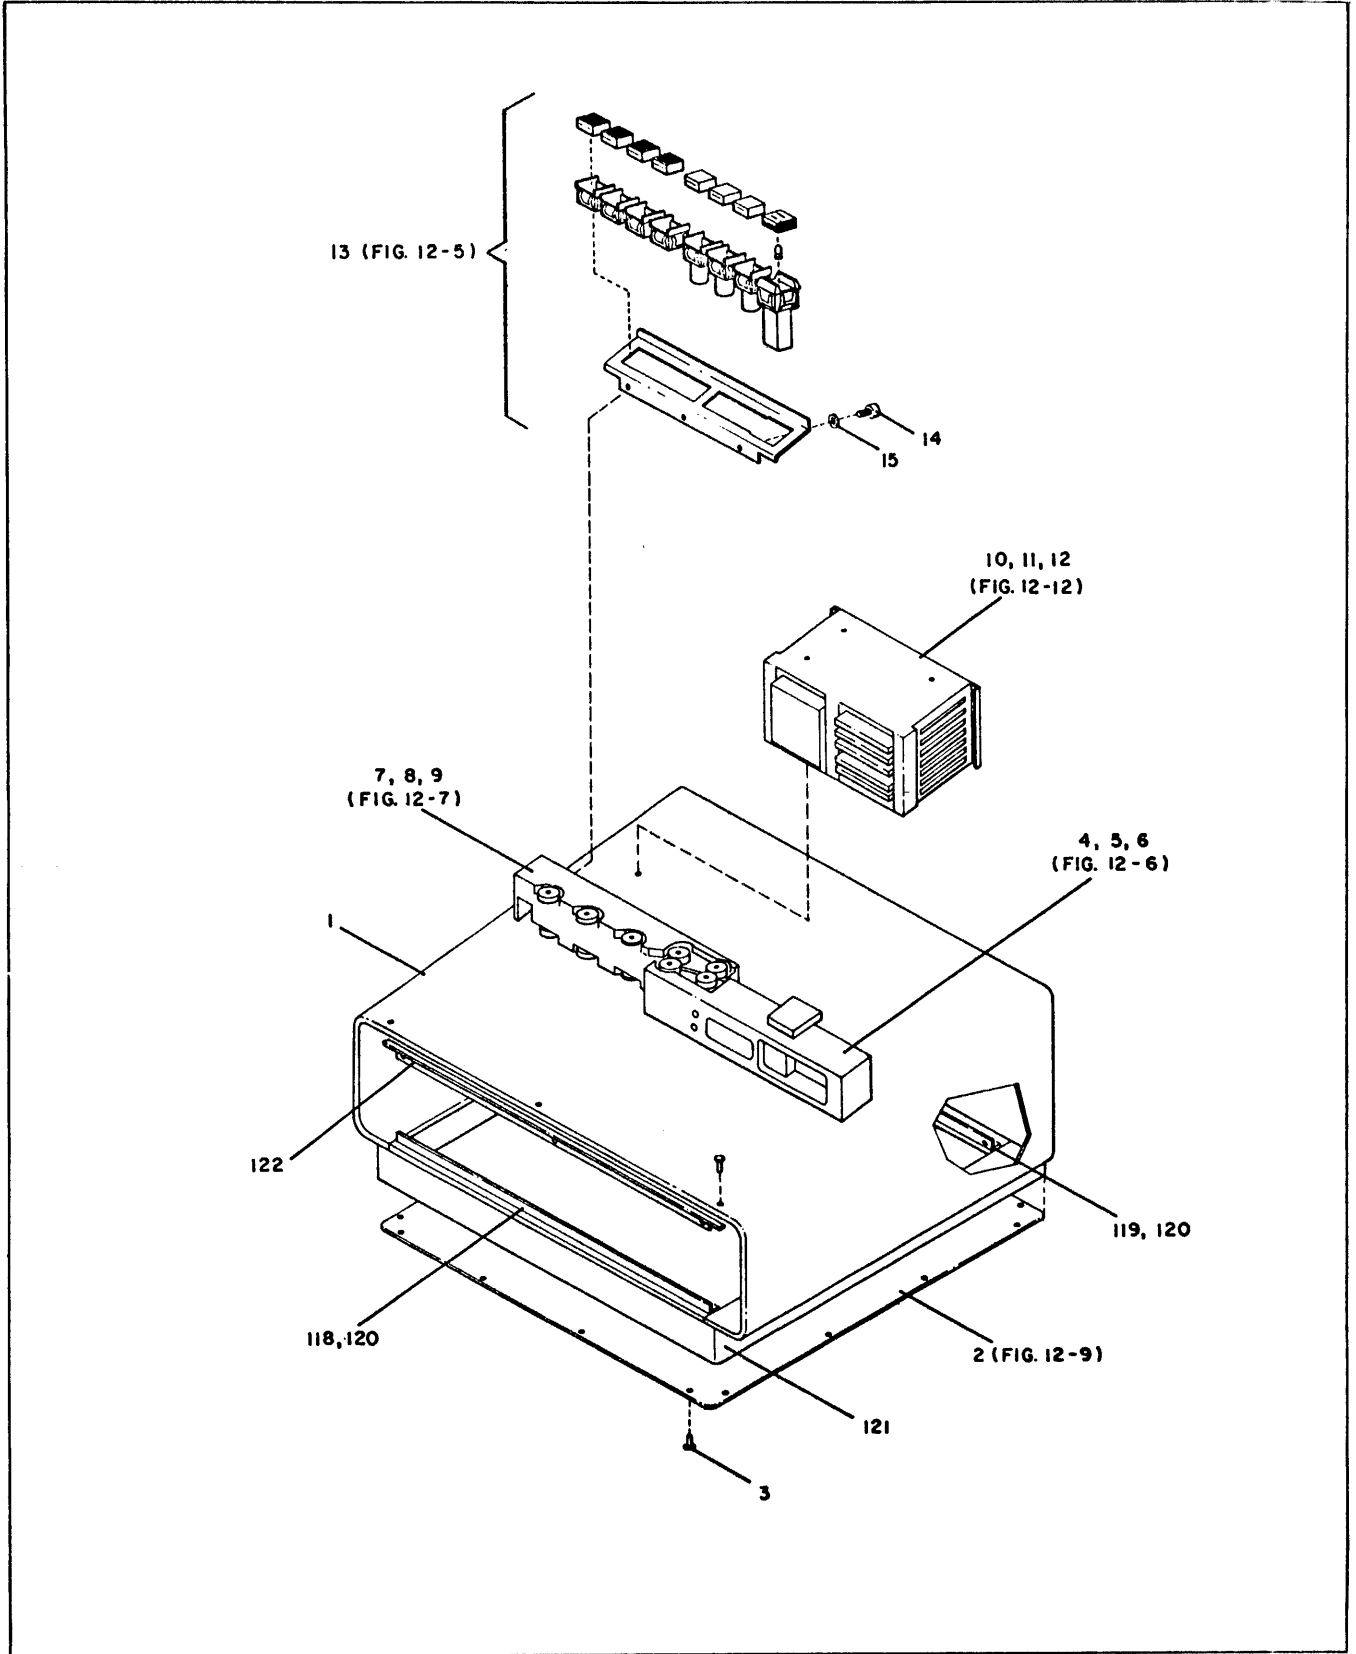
MAIN FRAME ASSEMBLY (sheet 1 of 3)
